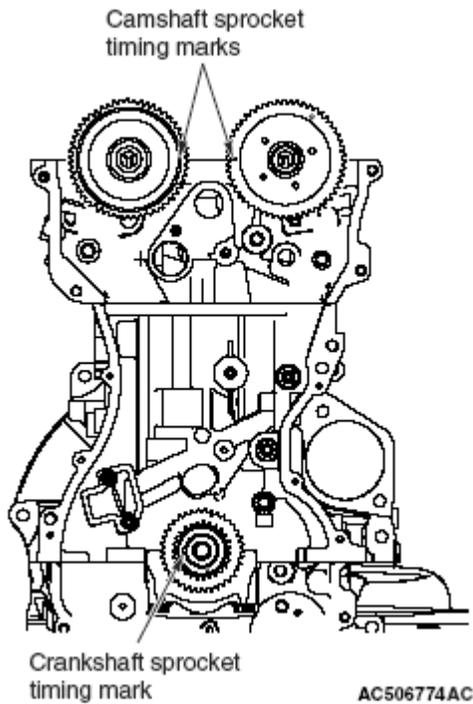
Identifying Camshaft Sprockets And Crankshaft Sprockets Timing Mark
